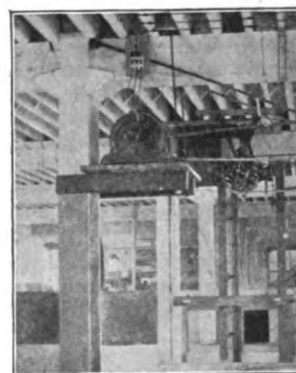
MOTOR IN ASSEMBLY ROOM OF THE MIAMI CYCLE AND MANUFACTURING CO.
